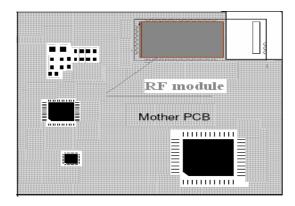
A recommended placement of the module on a mother PCB (Shaded area is ground-plane on mother PCB)
